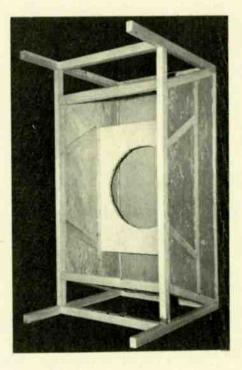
Enclosure fully concreted and ready to have the bass driver mounted on its board.
